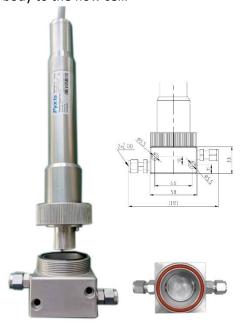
Pipeline installation using ST-774 Flow Cell Assembly (P/N: 53718) with dimensions (mm)
